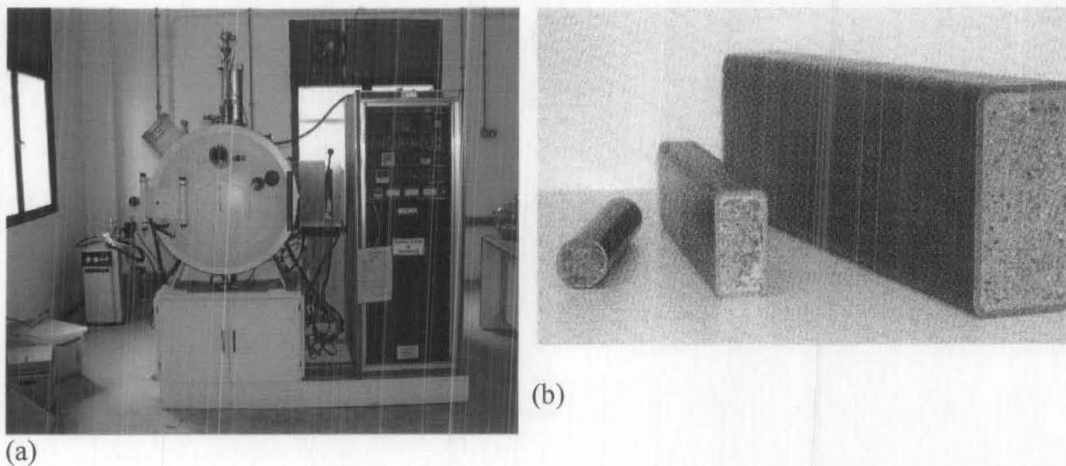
(a) The melting furnace (b) Simple foam parts [74].
